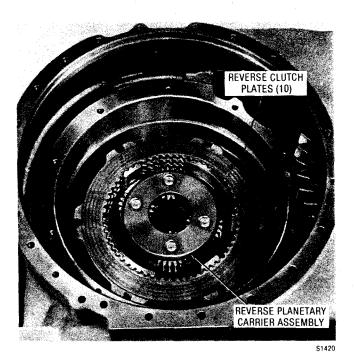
Reverse planetary carrier assembly and clutch plates
